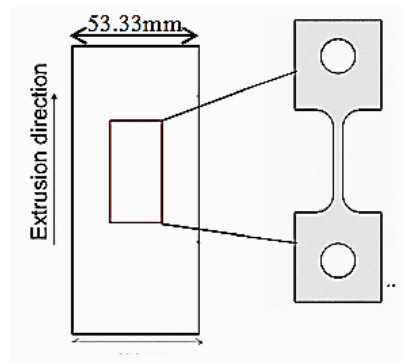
Laboratory extruded strip profile showing location of extracted tensile samples
